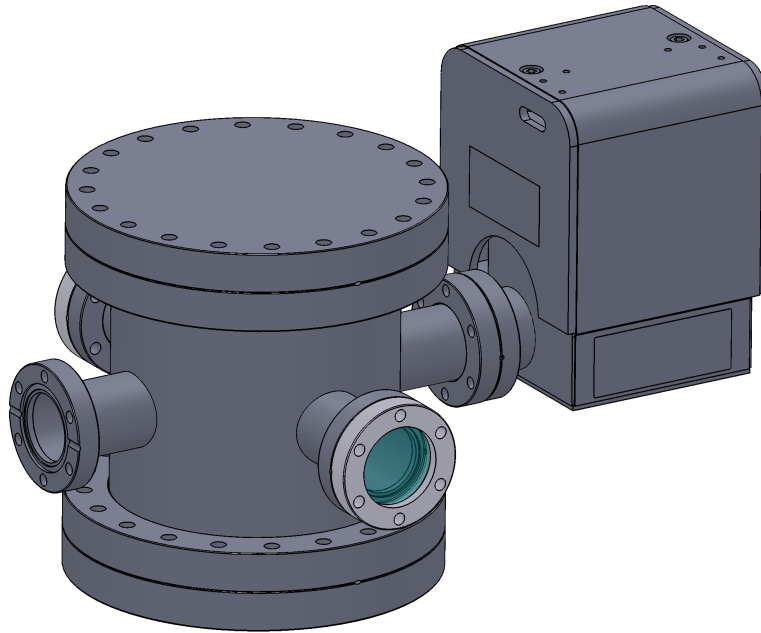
CAD model of the vacuum chamber used in the vacuum system. In the picture the ion pump is mounted as well as the viewports but not the turbomolecular pump.
